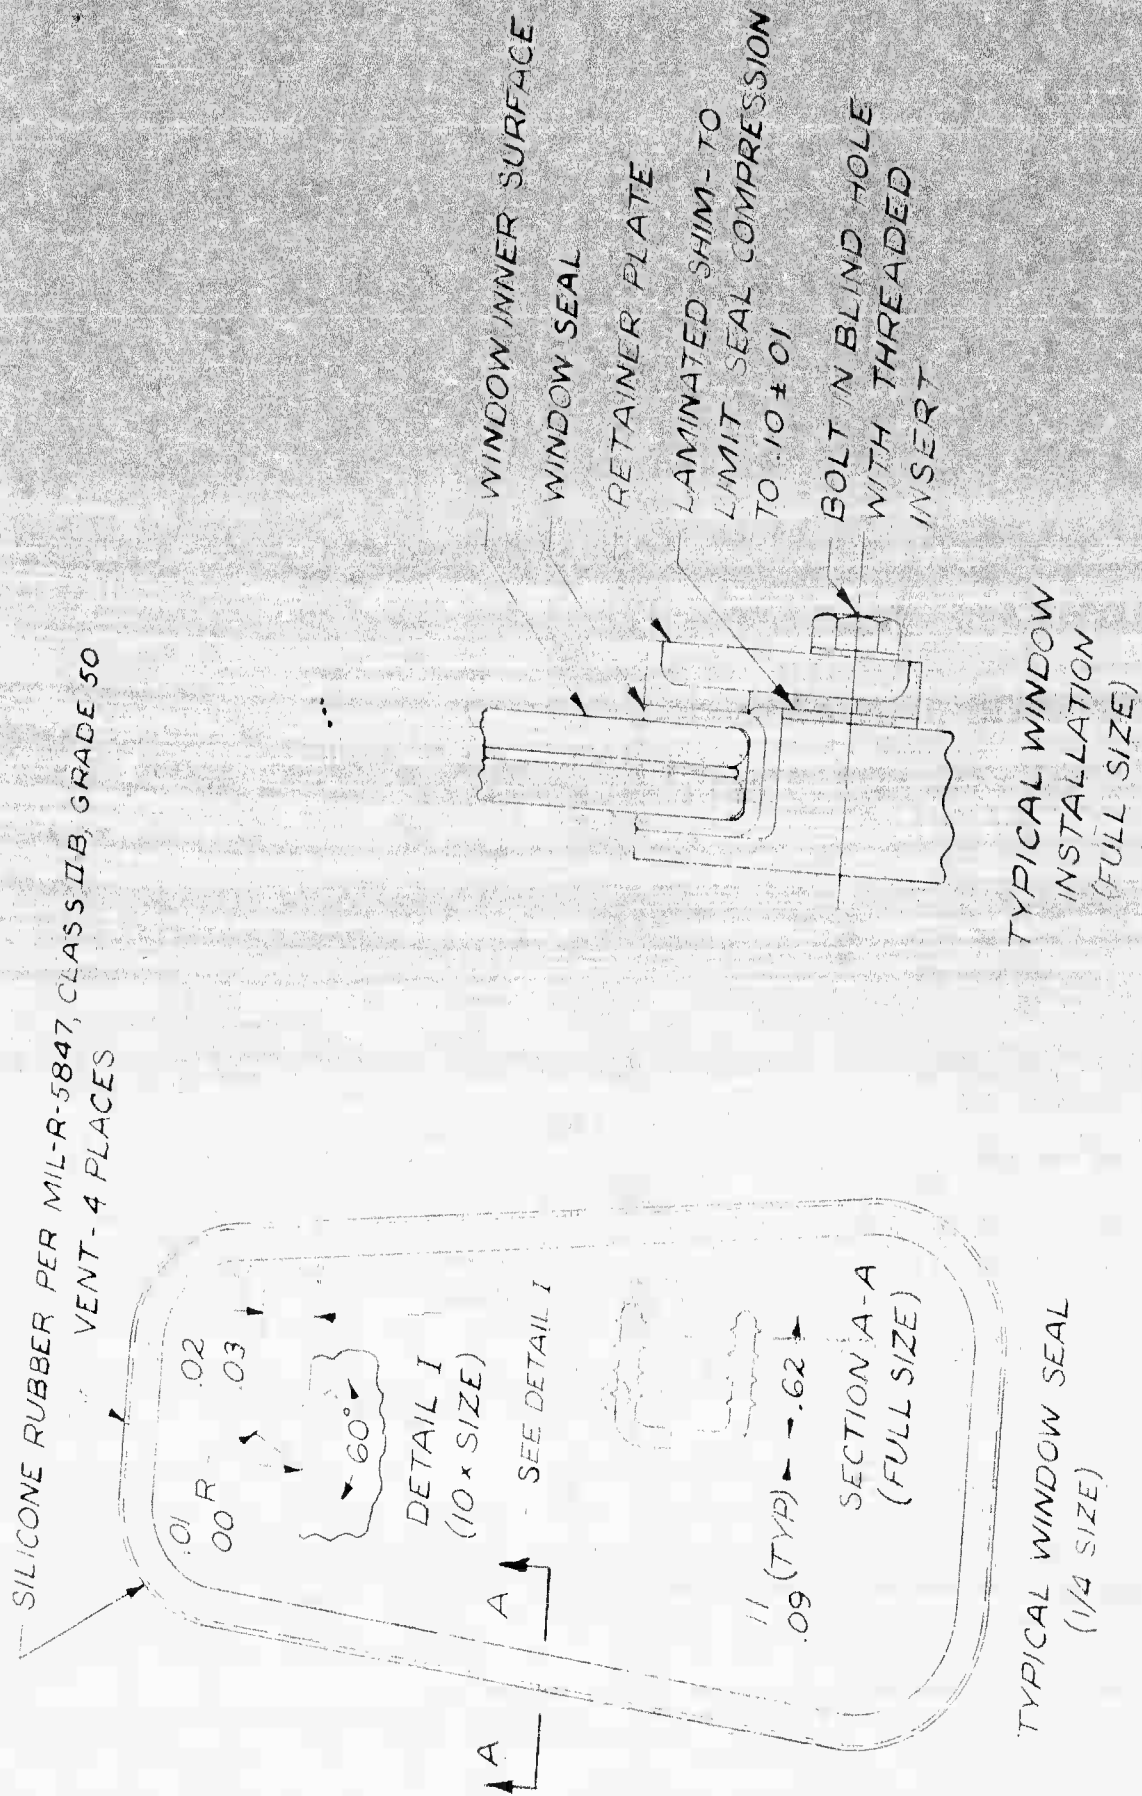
WINDOW SEAL DETAIL AND INSTALLATION
